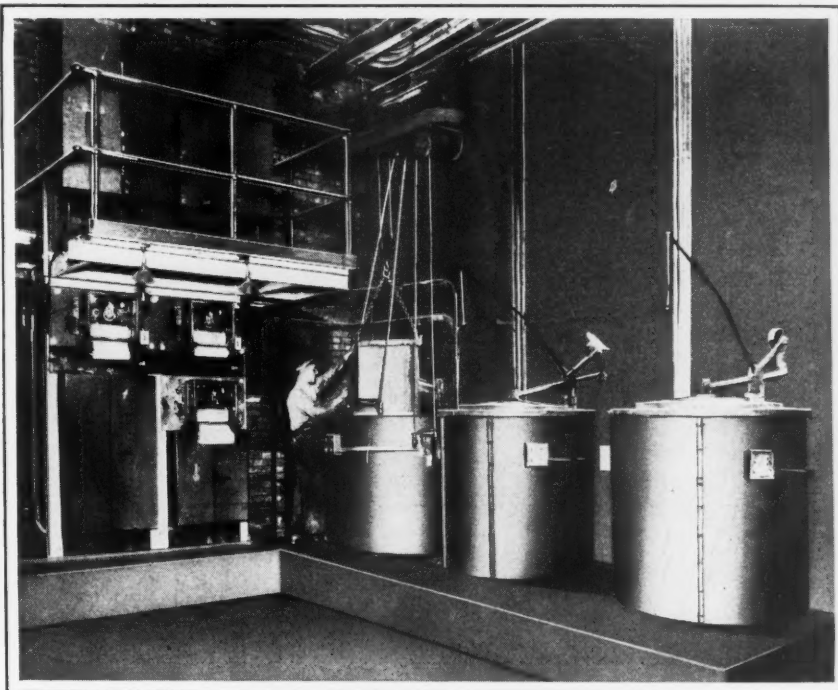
Three "Homo" Furnaces Employed for Tempering "Superrenches" and Other Parts
